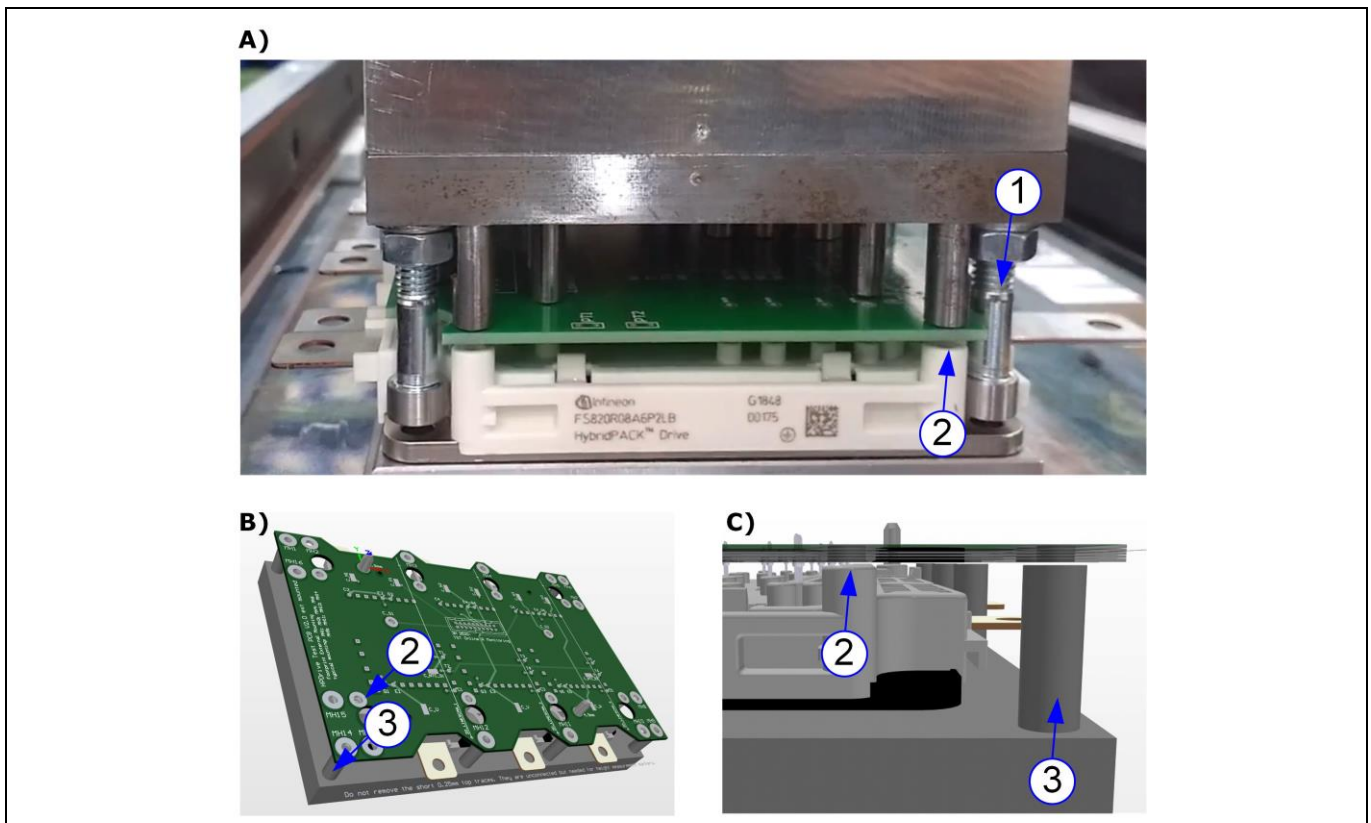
Example of distance press-in combined with module external mounted PCB. Distance keeper (1) ensure a certain distance of PCB to module dome (2). PCB can be fixed externally of the module (3).
